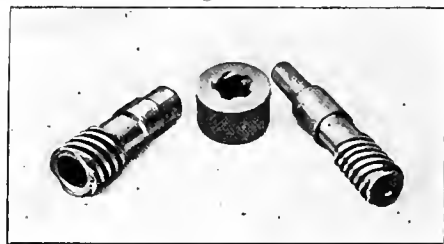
Multiple-threaded Screws and Nuts made by Method Described
